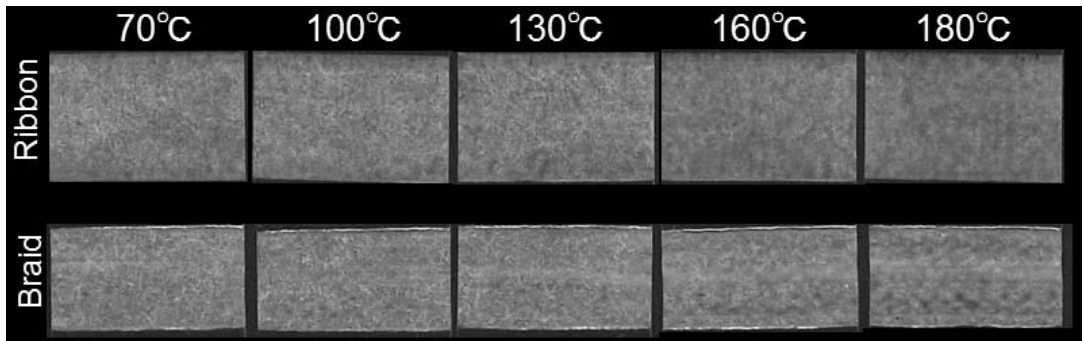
Photographs of heat sealed part after peel testing (180°C, 0.22 MPa).
